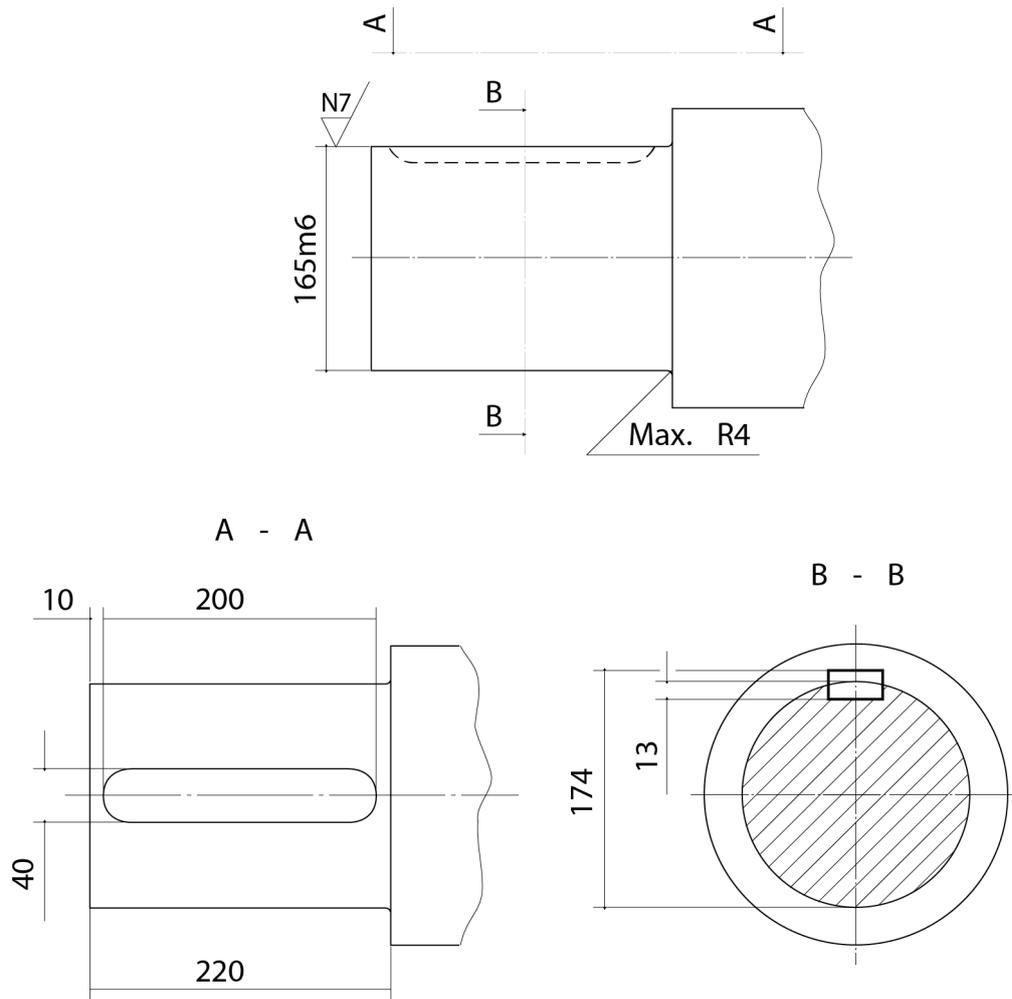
Shaft dimension for alternator, type B 16, cyl. 5 - 6 - 9
